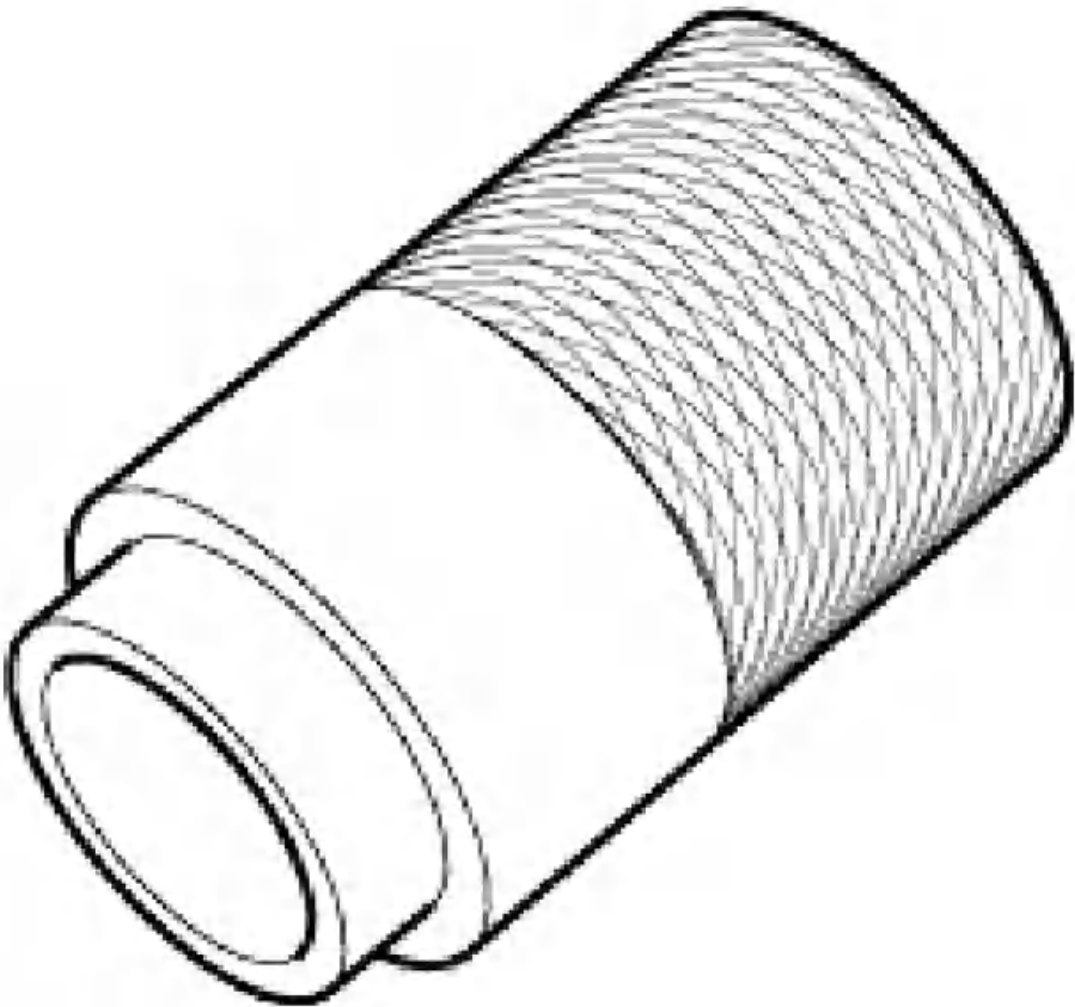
Identifying Special Tools 23 0 180 Impact Ring With Slip Sleeve](#)
